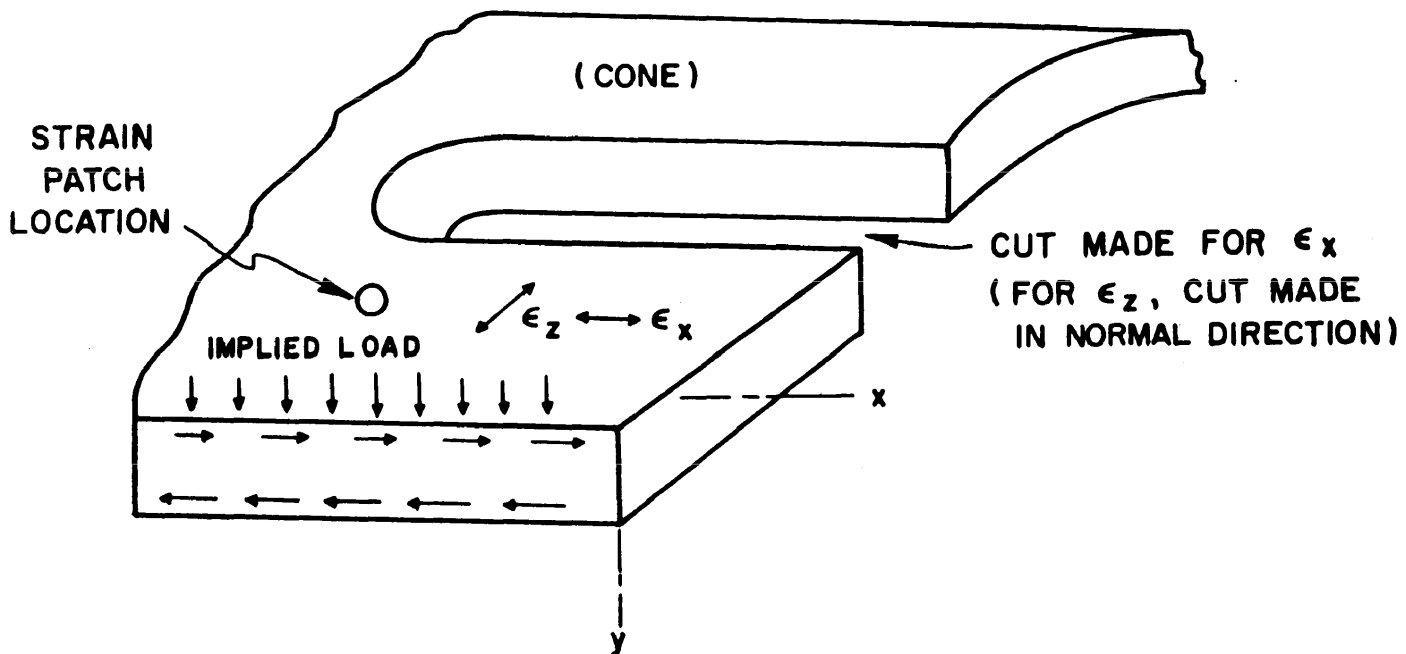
STRESS SYSTEM APPLIED TO CONE WALL
